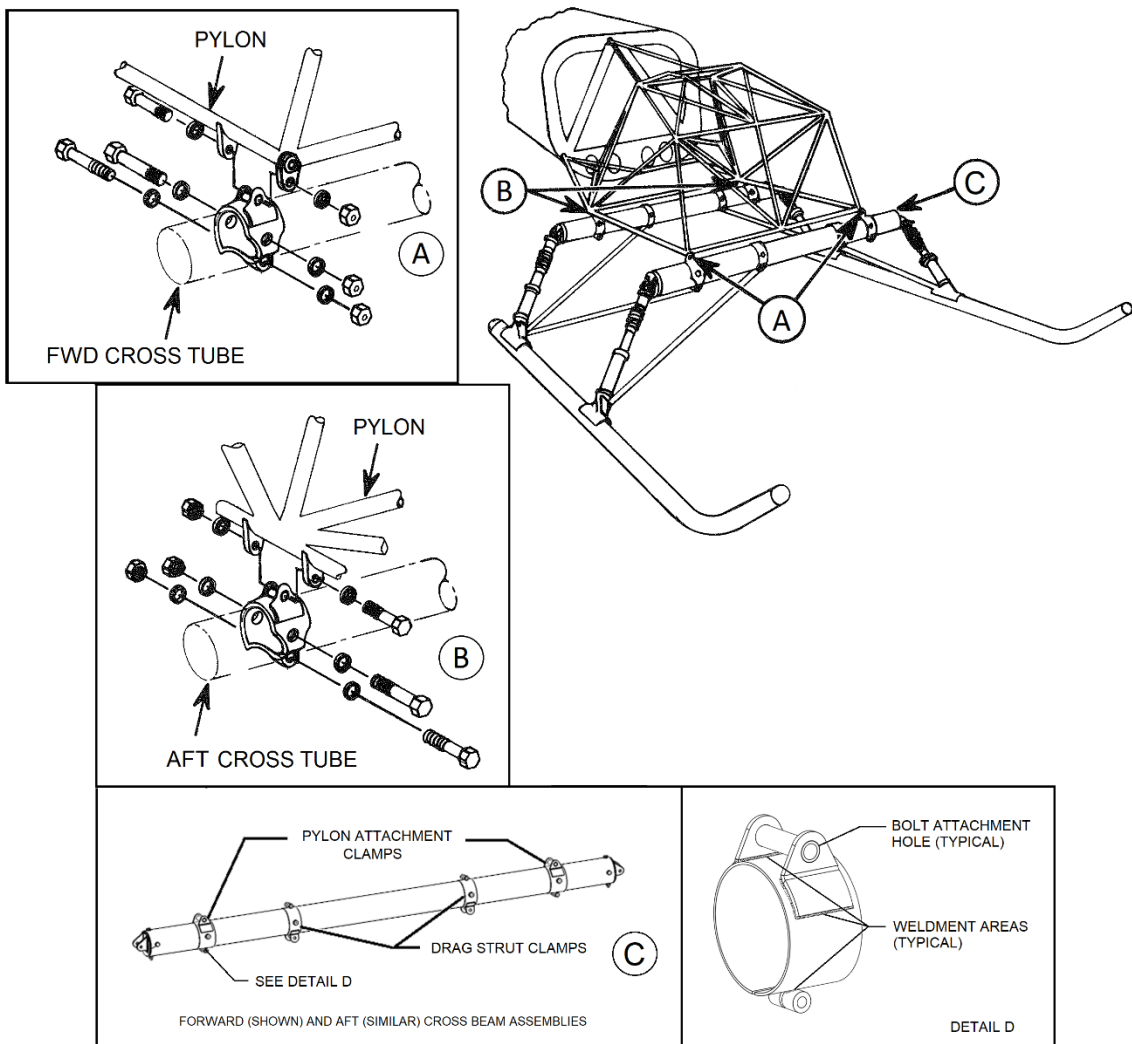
Landing Gear to Pylon Attachment and Cross Tube Clamp Detail
